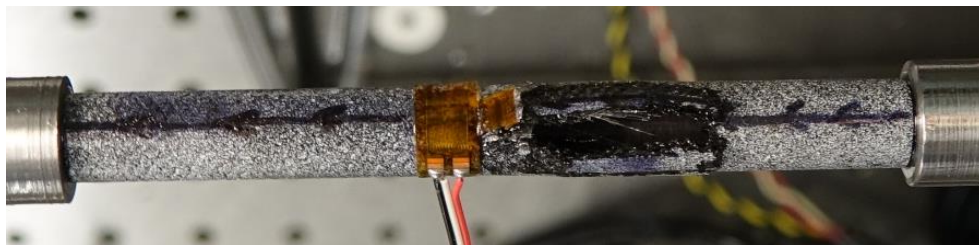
Tube 2c attached to fixture following failure
